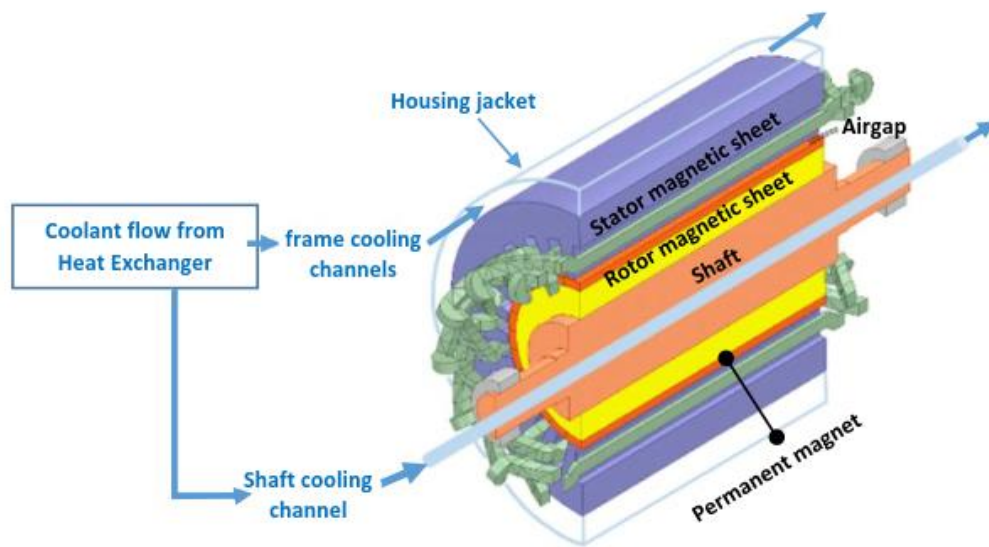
Cross section of the electric motor schematic (with its cooling system) [83], [87].
